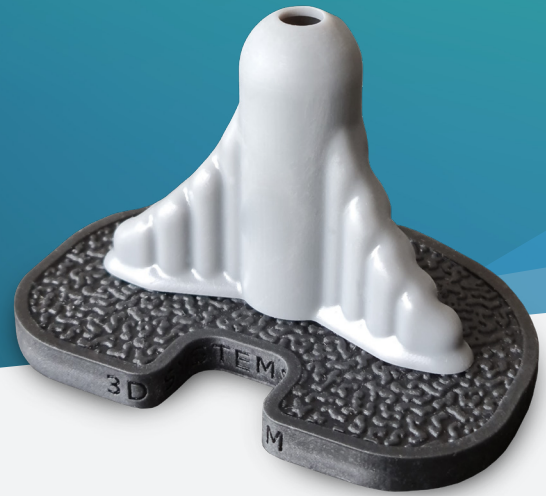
technology enables the production of plasma spray coating tools capable of protecting and masking medical implants during coating and sandblasting processes. Current applications include hip cup hole protection and tibial tray pivot protection.
